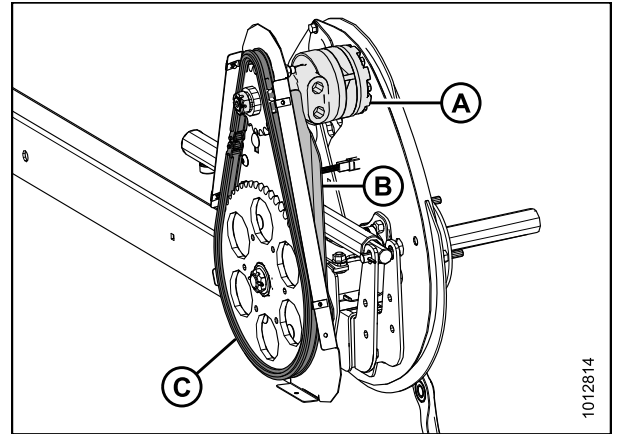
Single-Reel Drive Shown – Double Reel Similar
